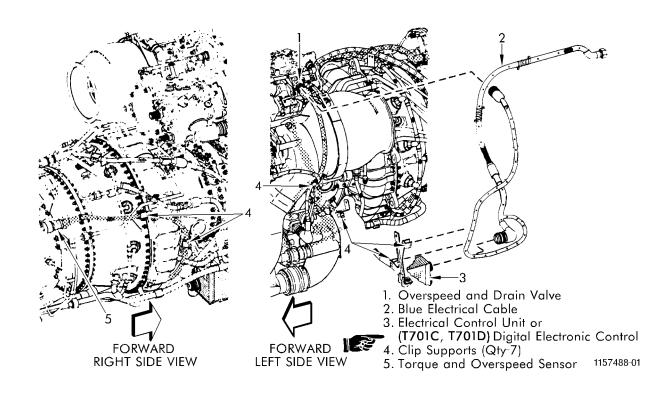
(T701, T701C, T701D) Blue Electrical Cable; Removal and Installation
